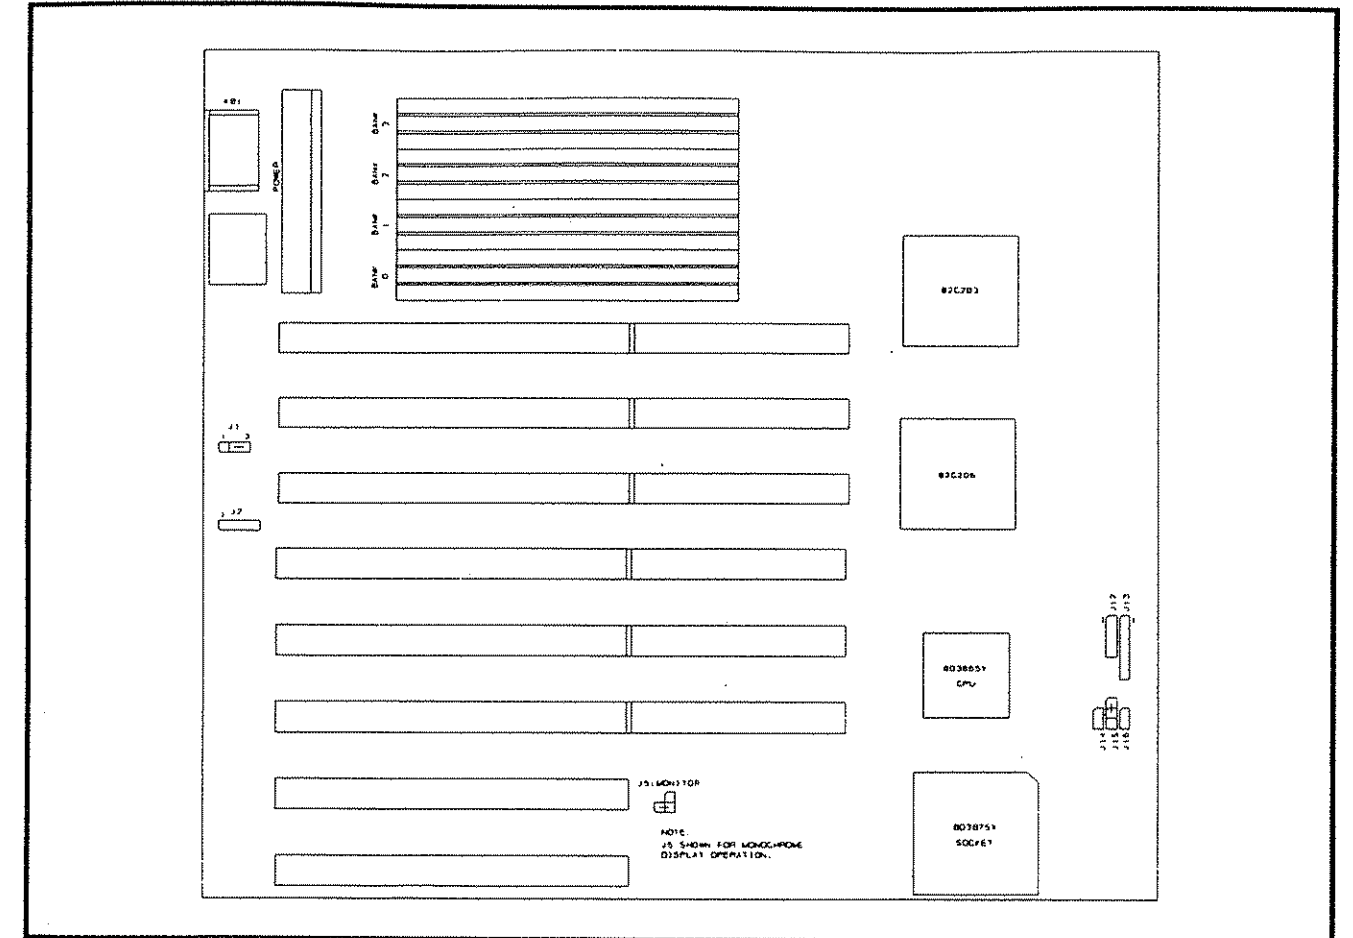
CPU Mother Board Assy 4A1, Jumper Plug Locations.
